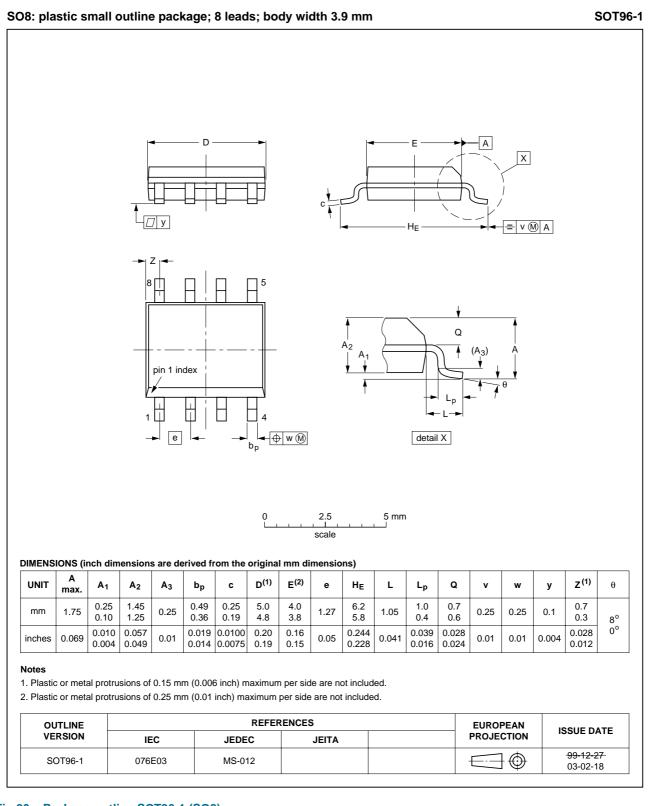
Package outline SOT96-1 (SO8) PCA9511A_4
